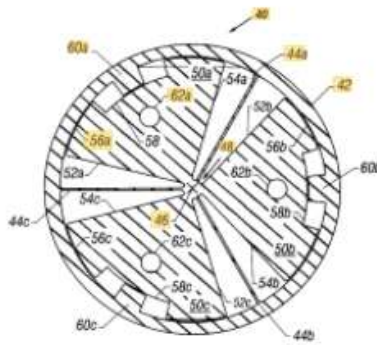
cross-sectional view of a rotary flexure embodying the invention [15].
